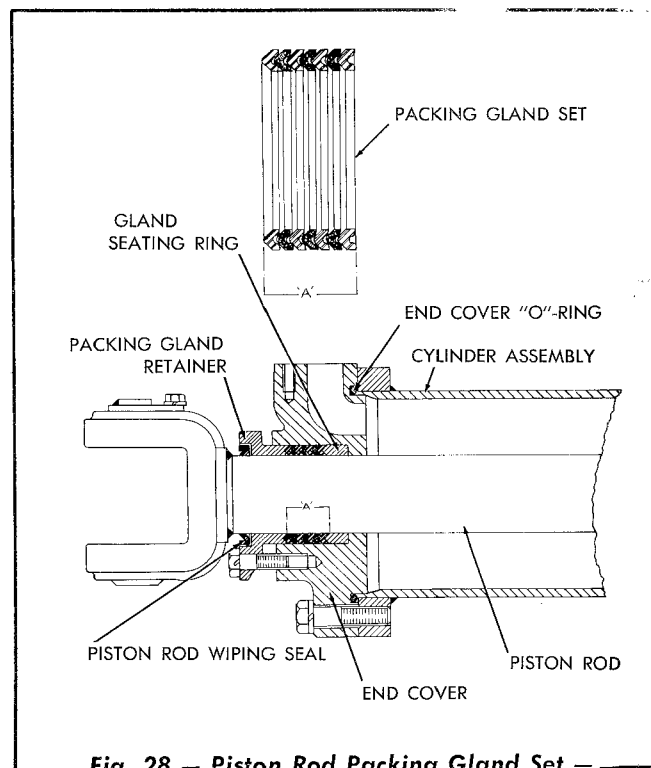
Piston Rod Packing Gland Set — Sectional View
